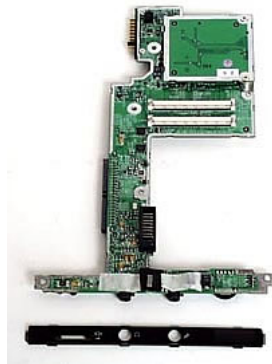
Removing the audio board screw and disconnecting the speakers
